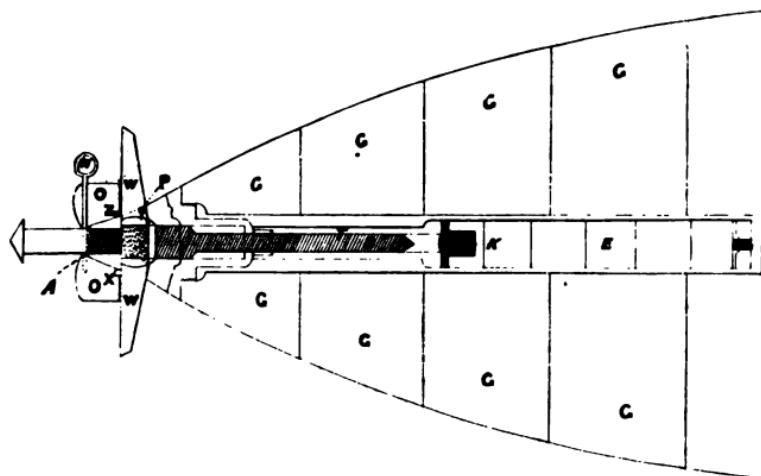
EXPLOSIVE HEAD WITH PISTOL AND PRIMER.
